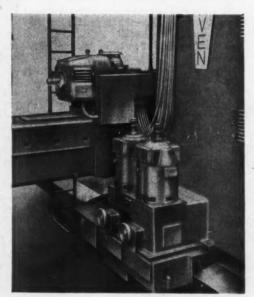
For this close-up view, covers have been removed from the front of the boring head, to expose the gearing whereby drive is transmitted to the spindle, facing head, and feed motions
